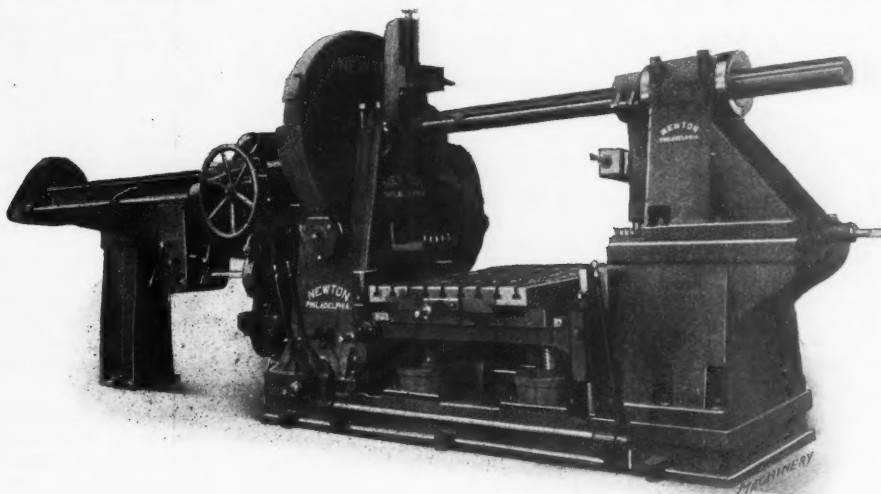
Front View of Newton Locomotive Cylinder Boring Machine
